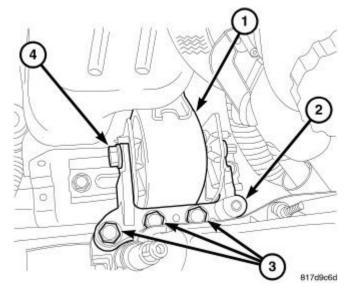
Right Engine Mount Assembly Courtesy of CHRYSLER GROUP, LLC
